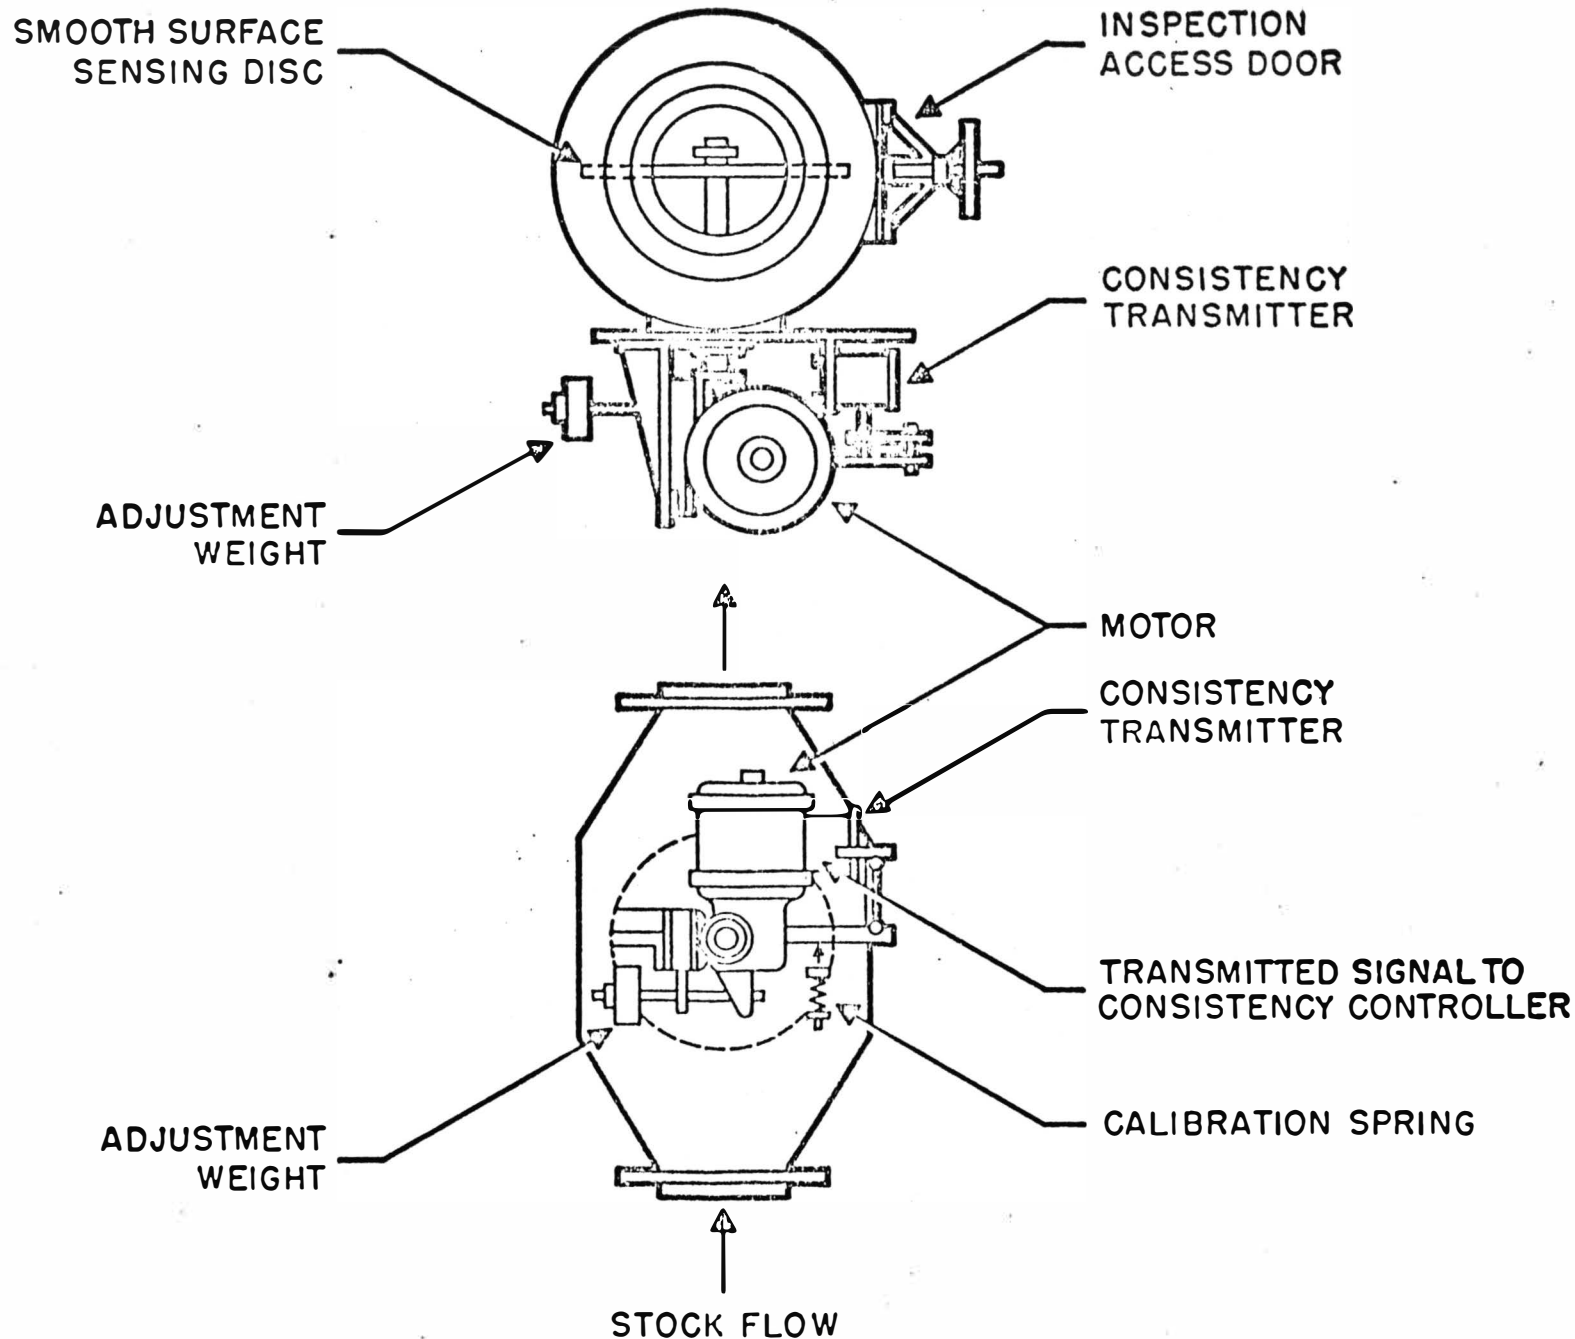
Pressurized In-line Rotating Sensing Element Type Consistency Transmitter with Smooth Surface Sensing Disc
